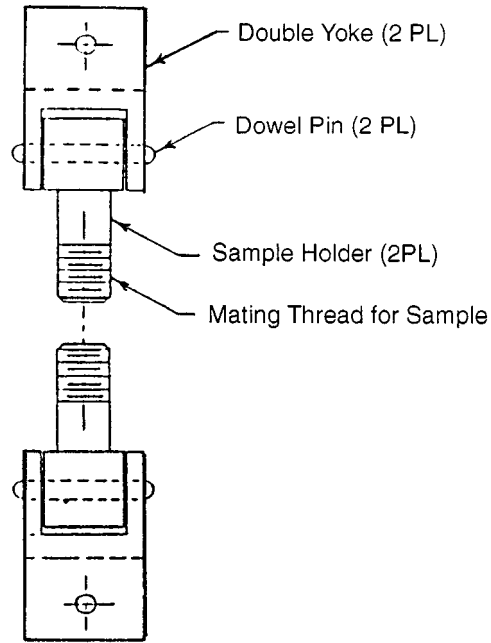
Adaptor to Mate the Gripping Device to the Tensile Machine
